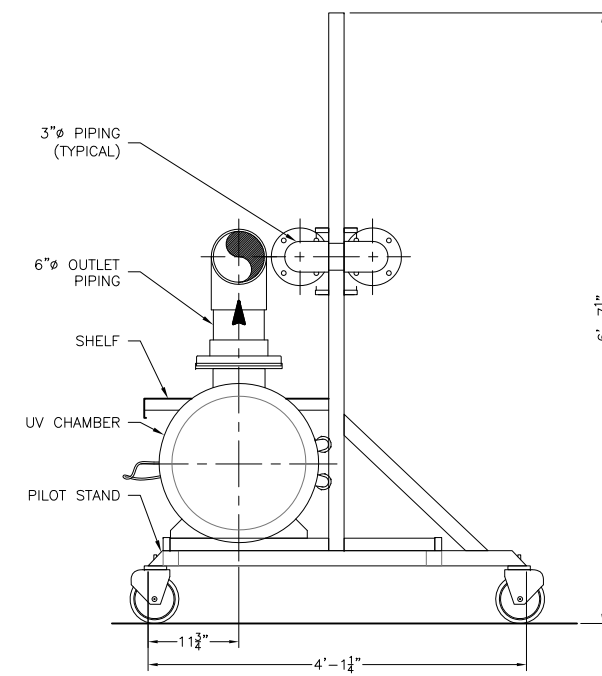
provides layout drawings for the Trojan UV pilot system.
